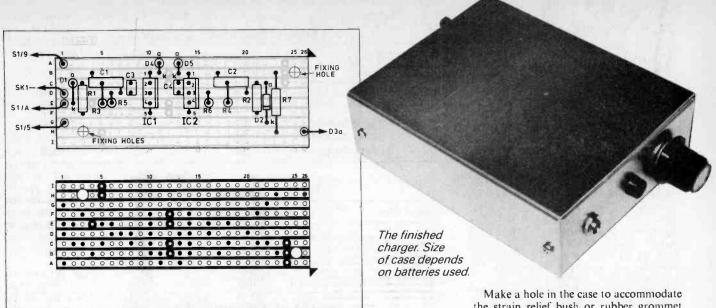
Stripboard component layout and details of breaks required in the underside copper tracks.
